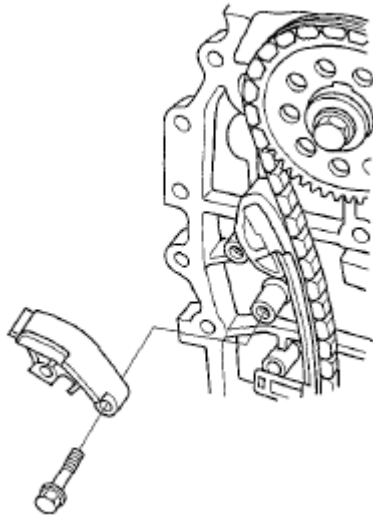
Identifying Tensioner Arm, Cam And Rod
